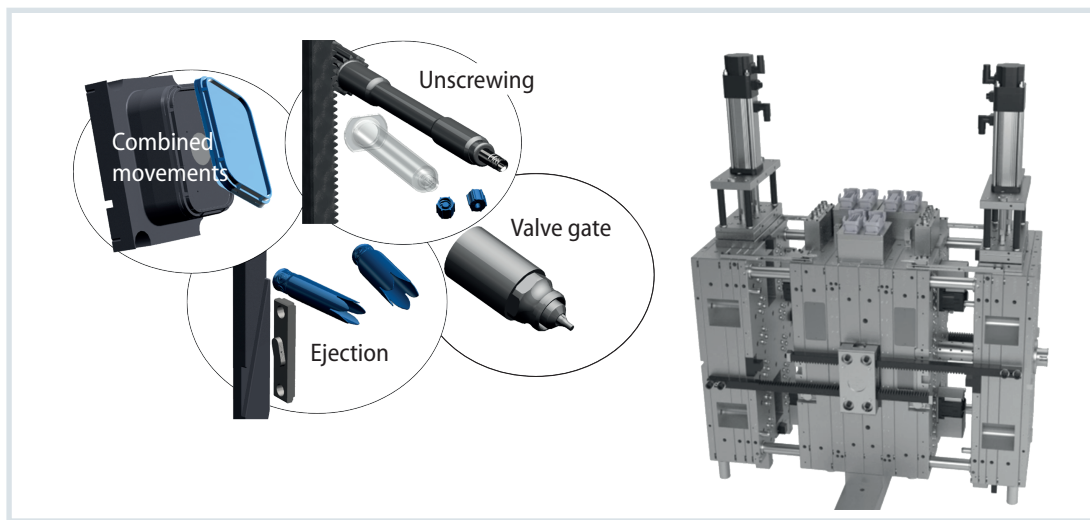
Solutions for electrical mold movements, for example a 72+72 cavity stack mold for the closing cone production © Schöttli/Husky
